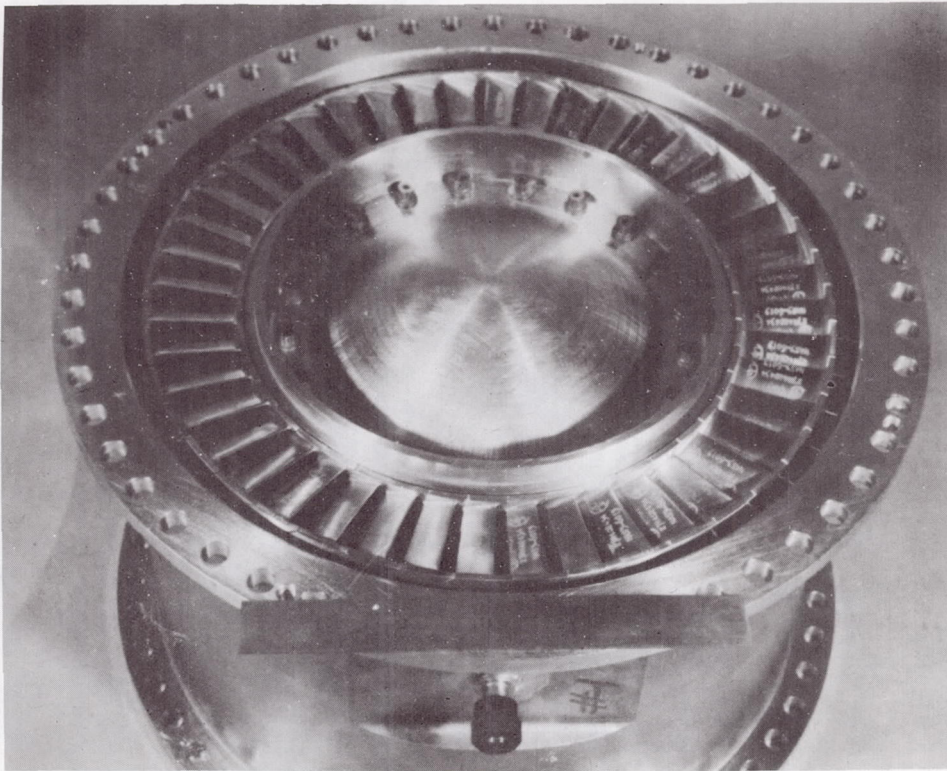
First-Stage Nozzle Vanes Assembled in Turbine Inlet Case (M-44255)
